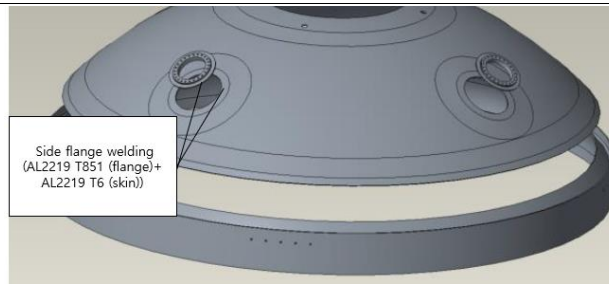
Side Flange Welding (TBD. Oct. 30, 2023)
